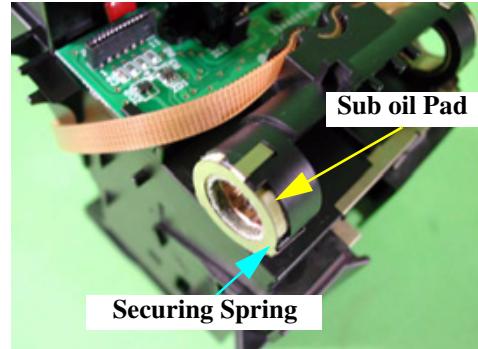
Cleaning the Carriage Guide Shaft
